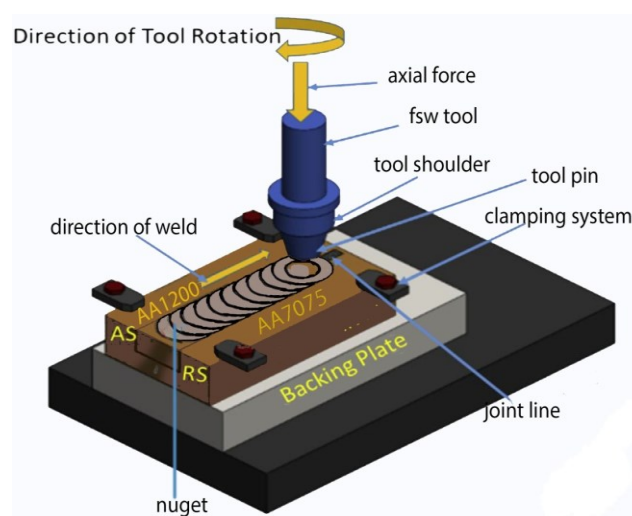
Schematic Representation of the friction stir welding Process
